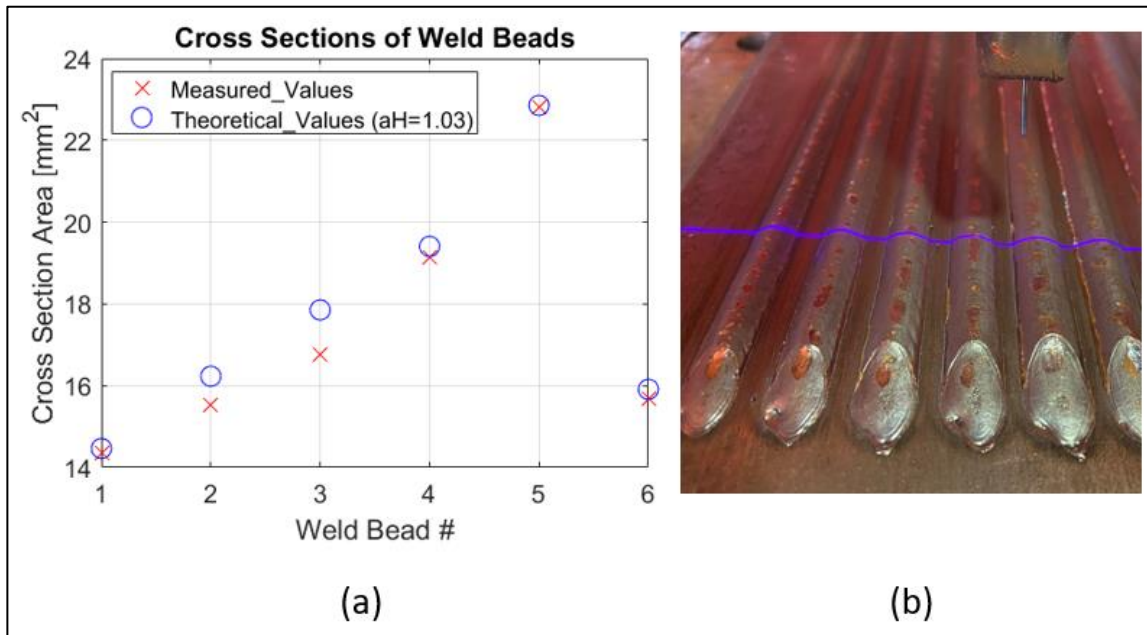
Highlighted cross section of welding beads with different welding parameters: (a) Measured values with laser scanner relative to theoretical values of Equation (4.2) (b) Deposited welding beads (front side-end of weld beads)
